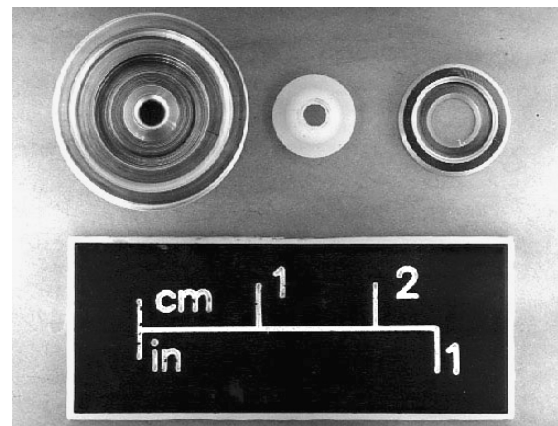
RPOV seat assembly piece parts: left, seat; middle, preform; and right, retainer.
